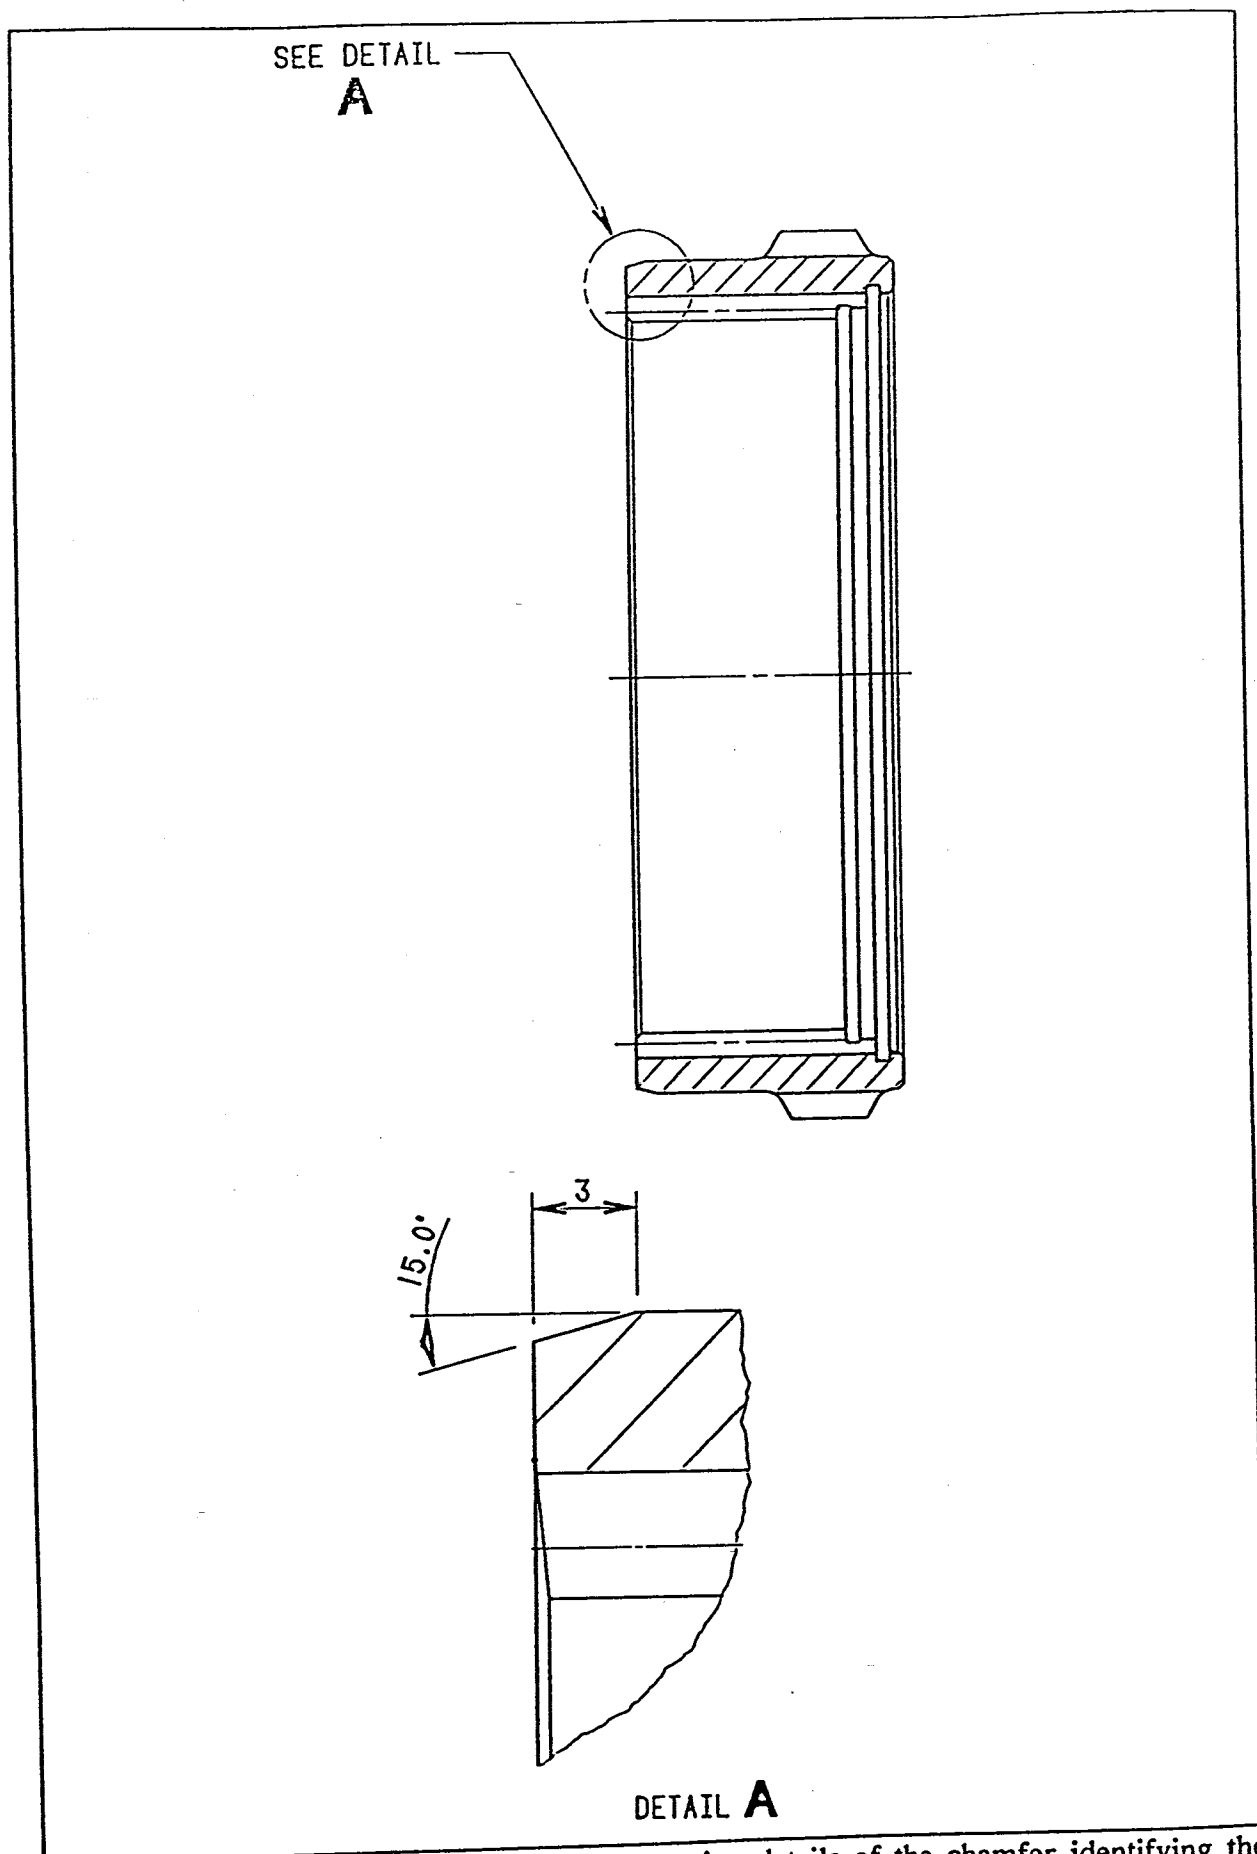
Sketch of the location and construction details of the chamfer identifying the new design ring gear.
